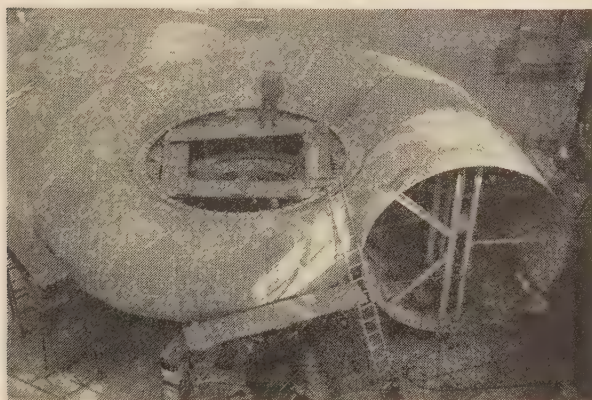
WELDED-PLATE; TURBINE CASING
